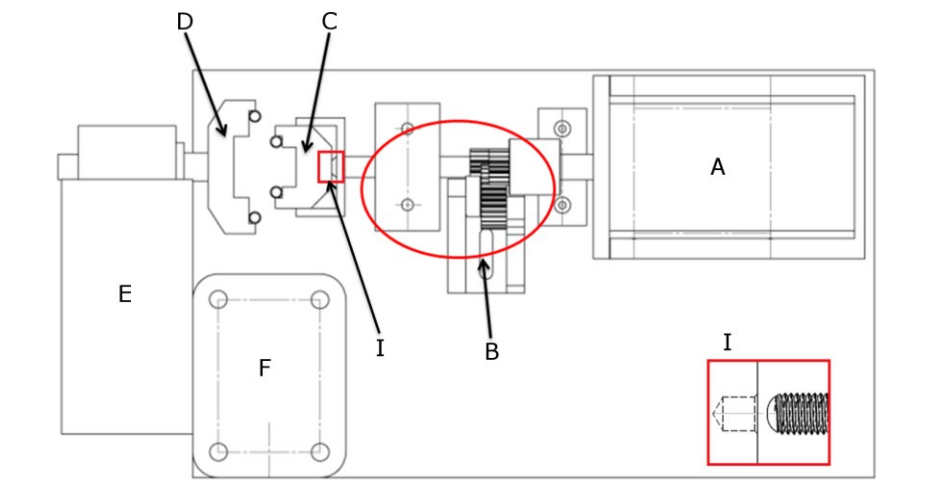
A top down view of the designed four-point bending mechanism. The labeled parts are: A) stepper motor; B) 1:1 gearing and 8-32 going through threaded block; C) compressive side jaw; D) tensile side jaw; E) load cell; and F) load cell connector. I is the inset of the open ball joint used to allow for free rotation of the jaw on the thrust axis. The compressive side of the jaw is driven by the stepper motor; both jaws have cylindrical pins as the contact points with the sample. The pins are glued to the jaws. The load cell is rigidly attached to the baseplate via a large block of aluminum (F).
